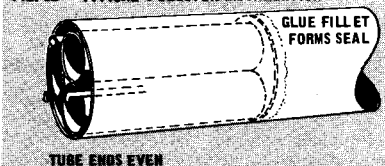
shows a typical engine mounting system for a three-engine model. The spaces between tubes are sealed at the front of the engine mounting tubes by gluing an adapter ring which fits the inside of the body in place as shown. To install the engine mount, smear a liberal amount of glue around the inside of the rear of the body tube. Immediately slide the engine mount unit into place so the rear of the engine mount tubes is even with the rear of the body and the engine retainer hooks project from the tube. Do not pause while inserting the engine mount or the glue may stick with the mount in the wrong place. Set the unit on its rear end while the glue dries.
